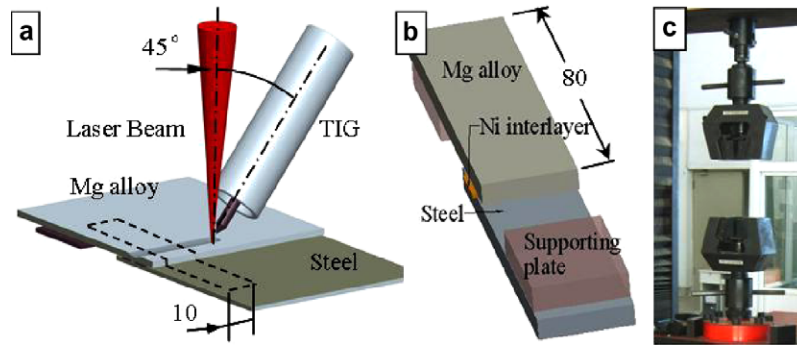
Sketch of (a) setup, (b) the specimen for tensile test and (c) tensile test machine (mm).
